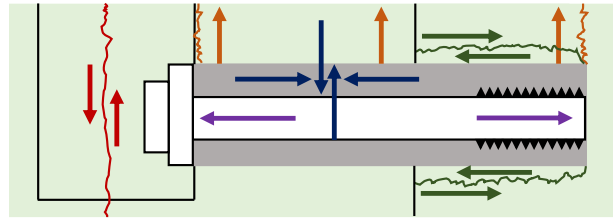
Side view of one bolt/insert pair in a spar cap side, showing failure modes considered: bolt tensile failure, insert von Mises yield, insert shear-out through top or bottom of spar cap side, insert pull-through, and spar cap shear at bolt-head hole.
